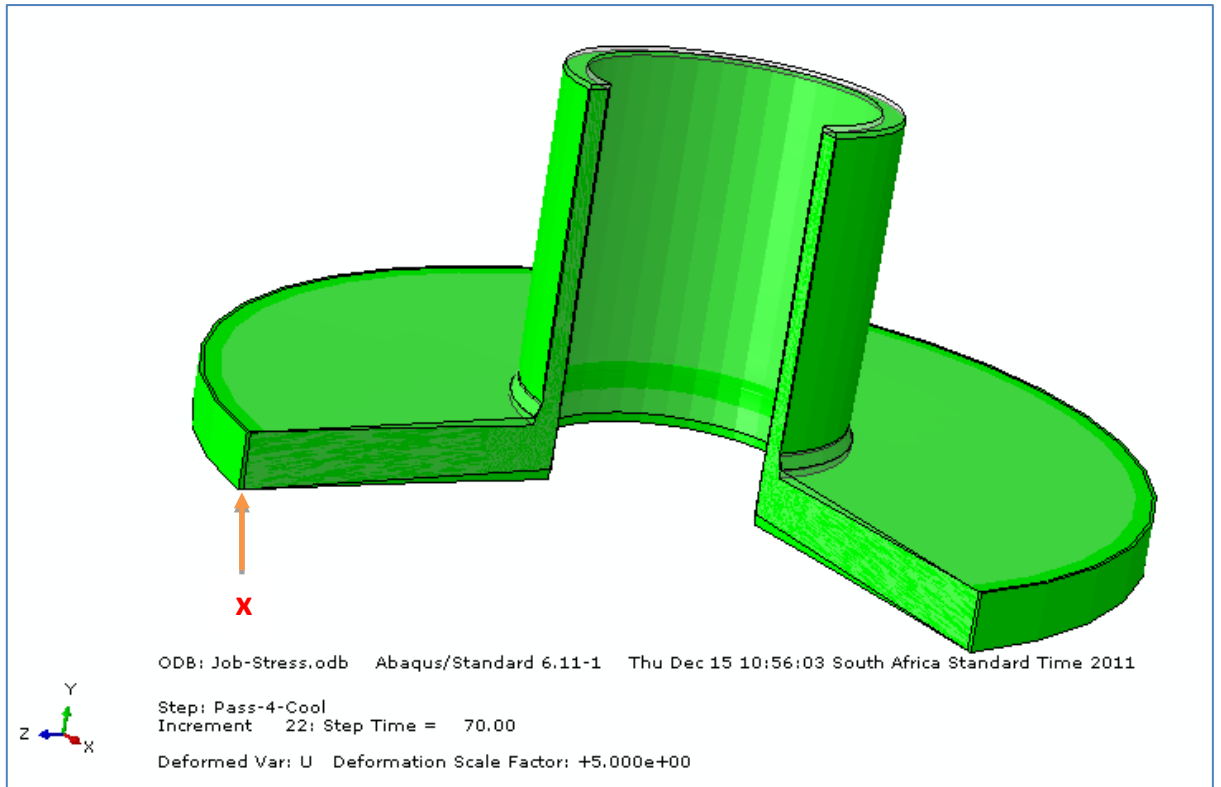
3D Deformed Shape of the Weld-piece
